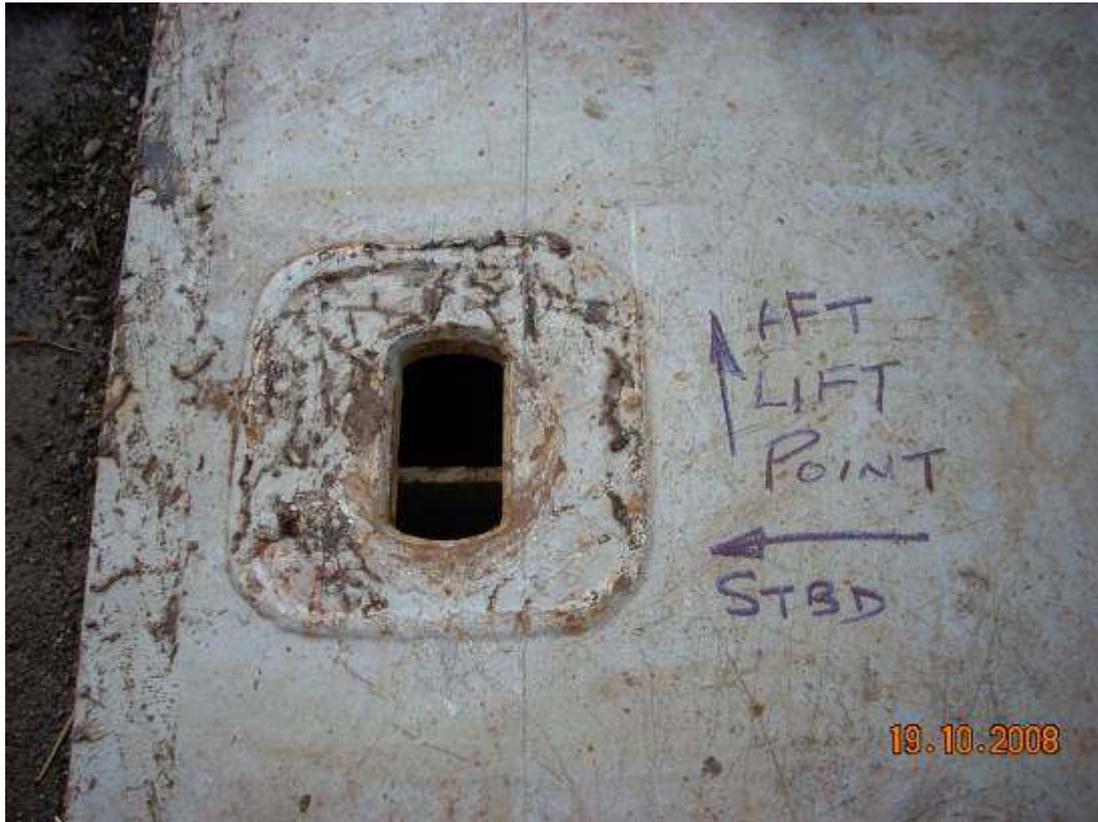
View indicating an inner container casting intended to be used with stacking cones.
